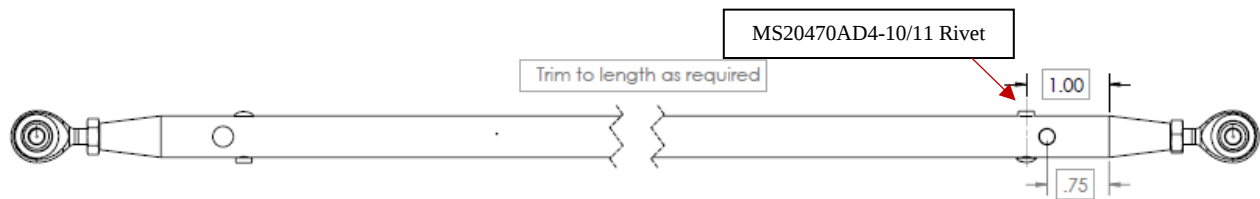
ROLL SERVO PUSH PULL ASSEMBLY
